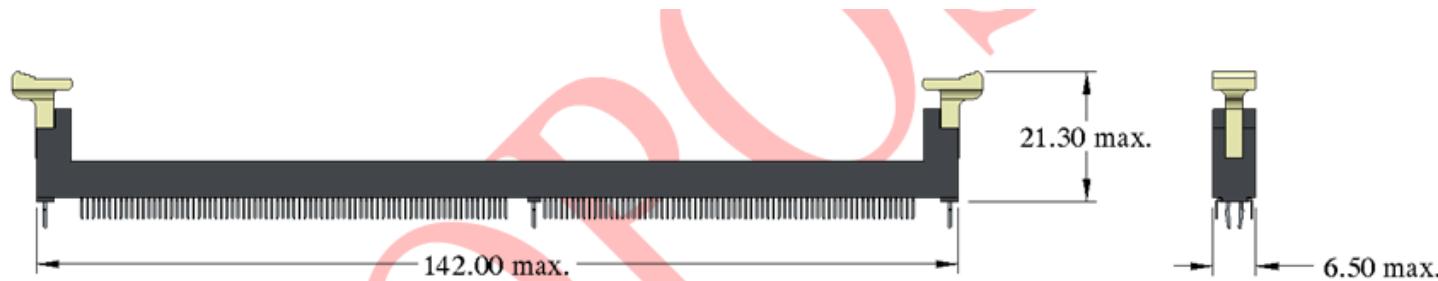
Plated Through Hole (PTH) Connector Socket Outline
